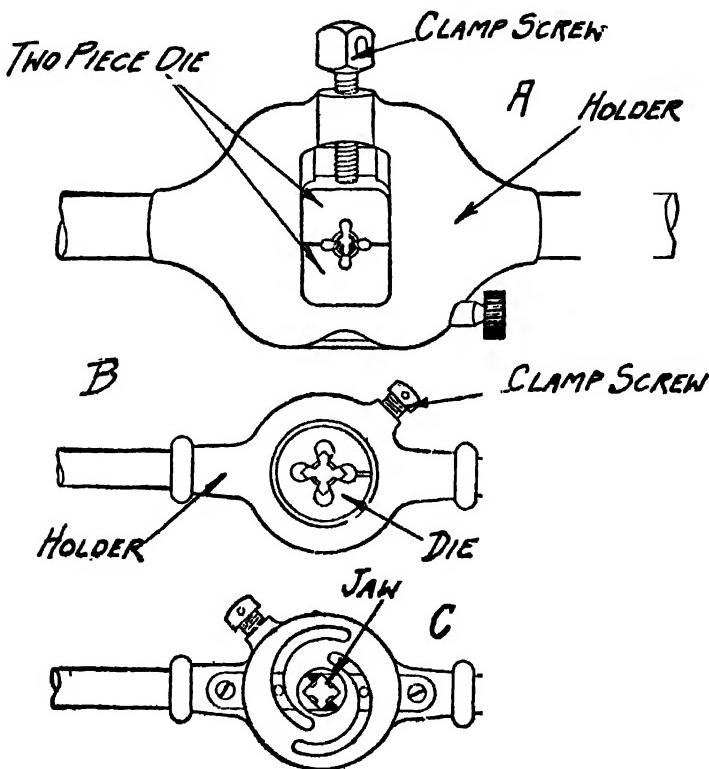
Showing Holder Designs for One and Two Piece Thread Cutting Dies.
